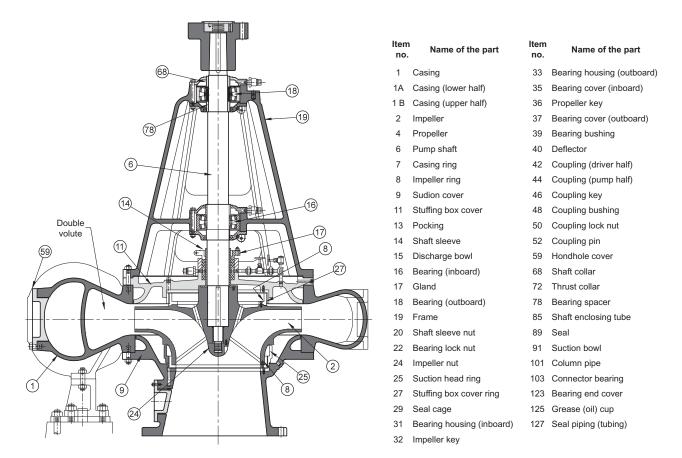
(1 of 2) Cross-sectional view of a vertical-shaft end-suction pump with a double-volute casing. Courtesy of Hydraulic Institute. (Numbers refer to parts listed in Fig. 3.149. (2 of 2) Centrifugal pump part identification. Courtesy of Hydraulic Institute.
